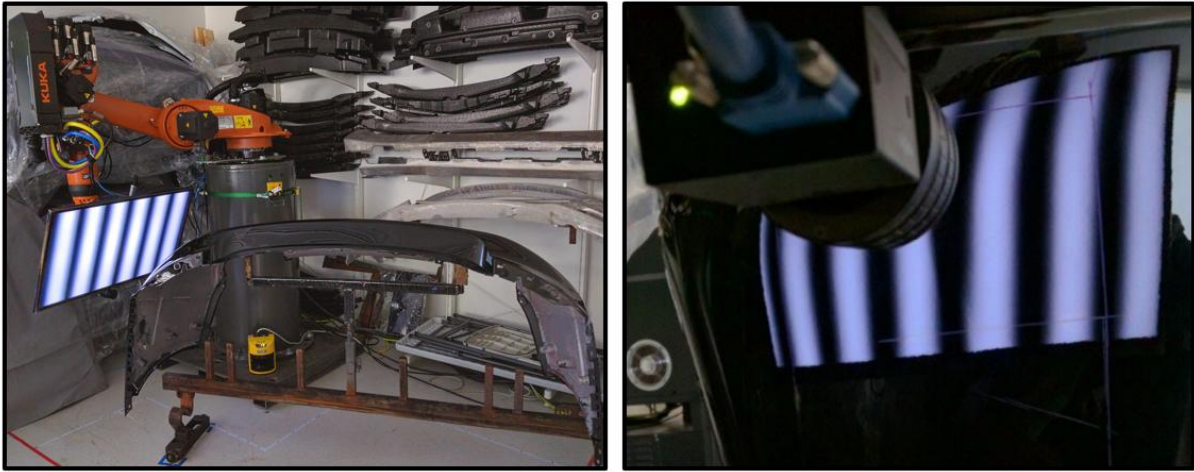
Robotic machine vision paint defect inspection setup. From: Akhtar et al. [25].
